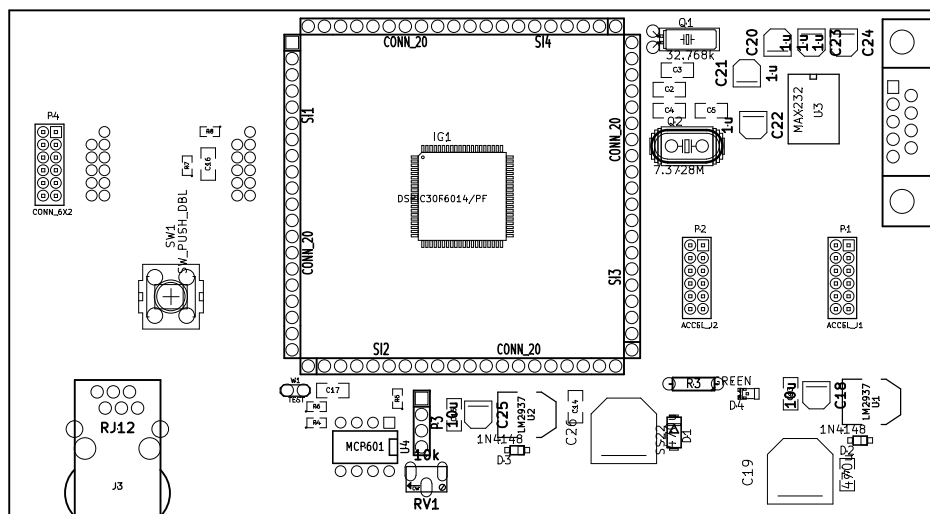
PCB layout for bottom copper layer (First Prototype)
